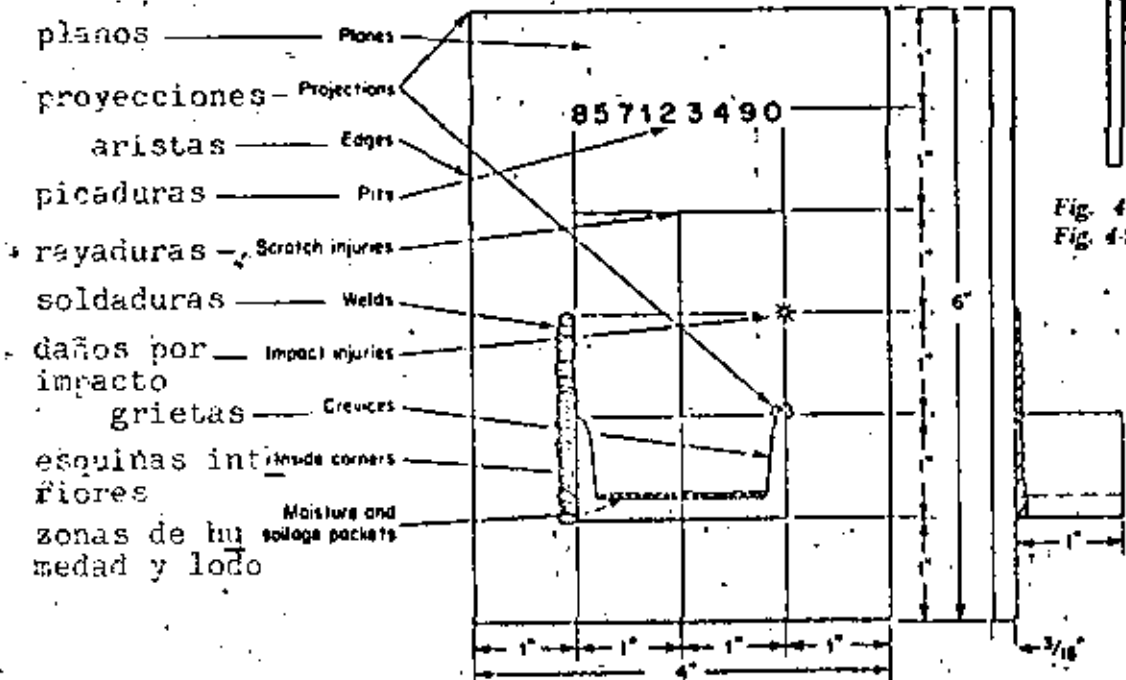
KTA coating test panel. Placa para ensayo de recubrimiento KTA
